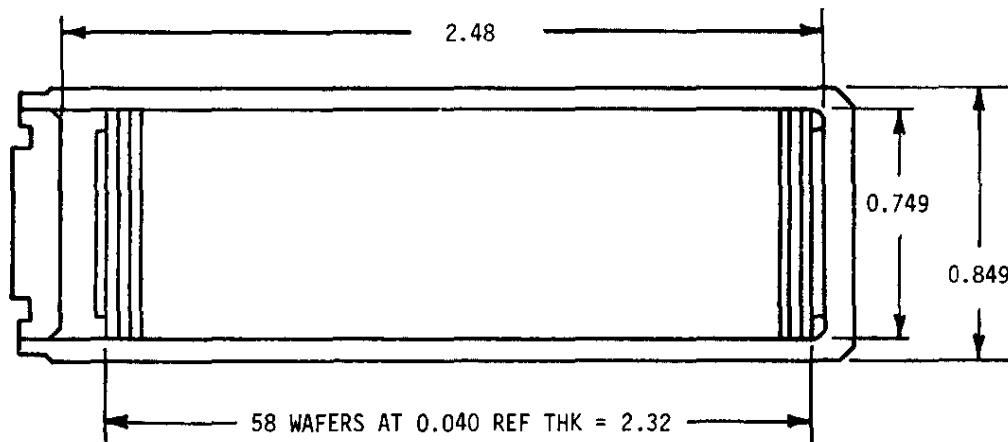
FUEL CAPSULE FOR WANL UNIT
